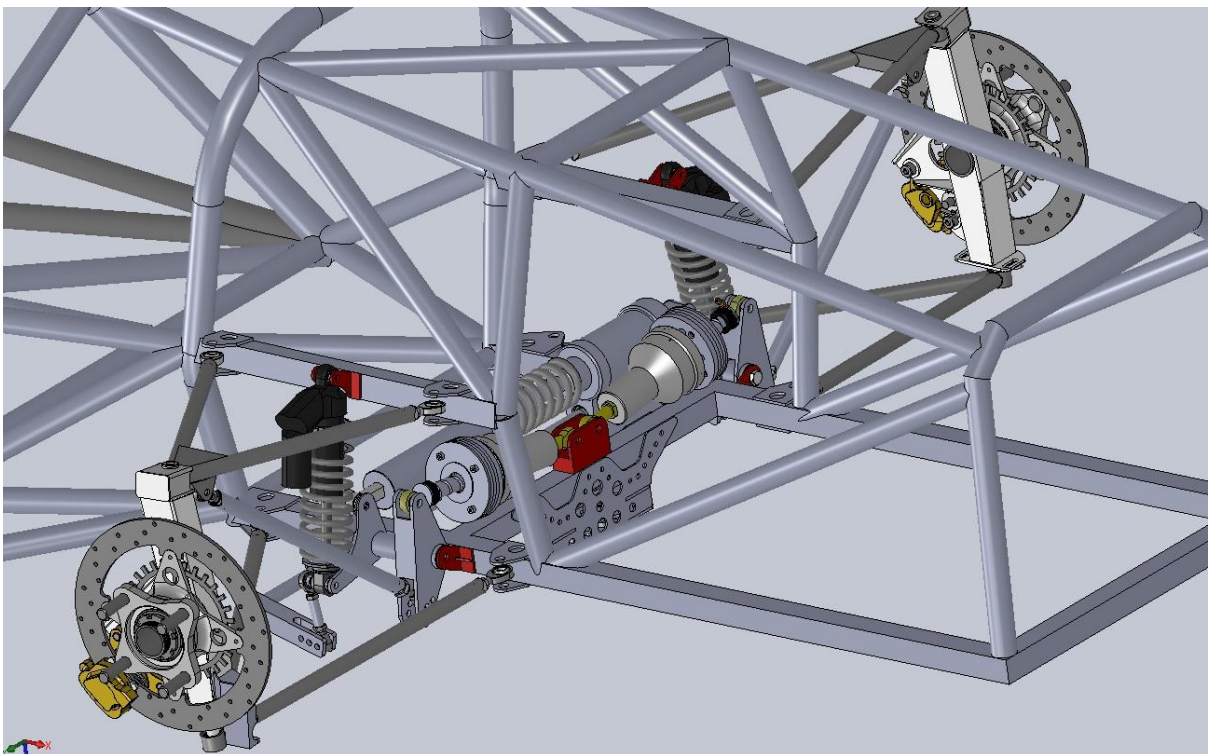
3D CAD detailed design of the new front suspension incorporating inerter
